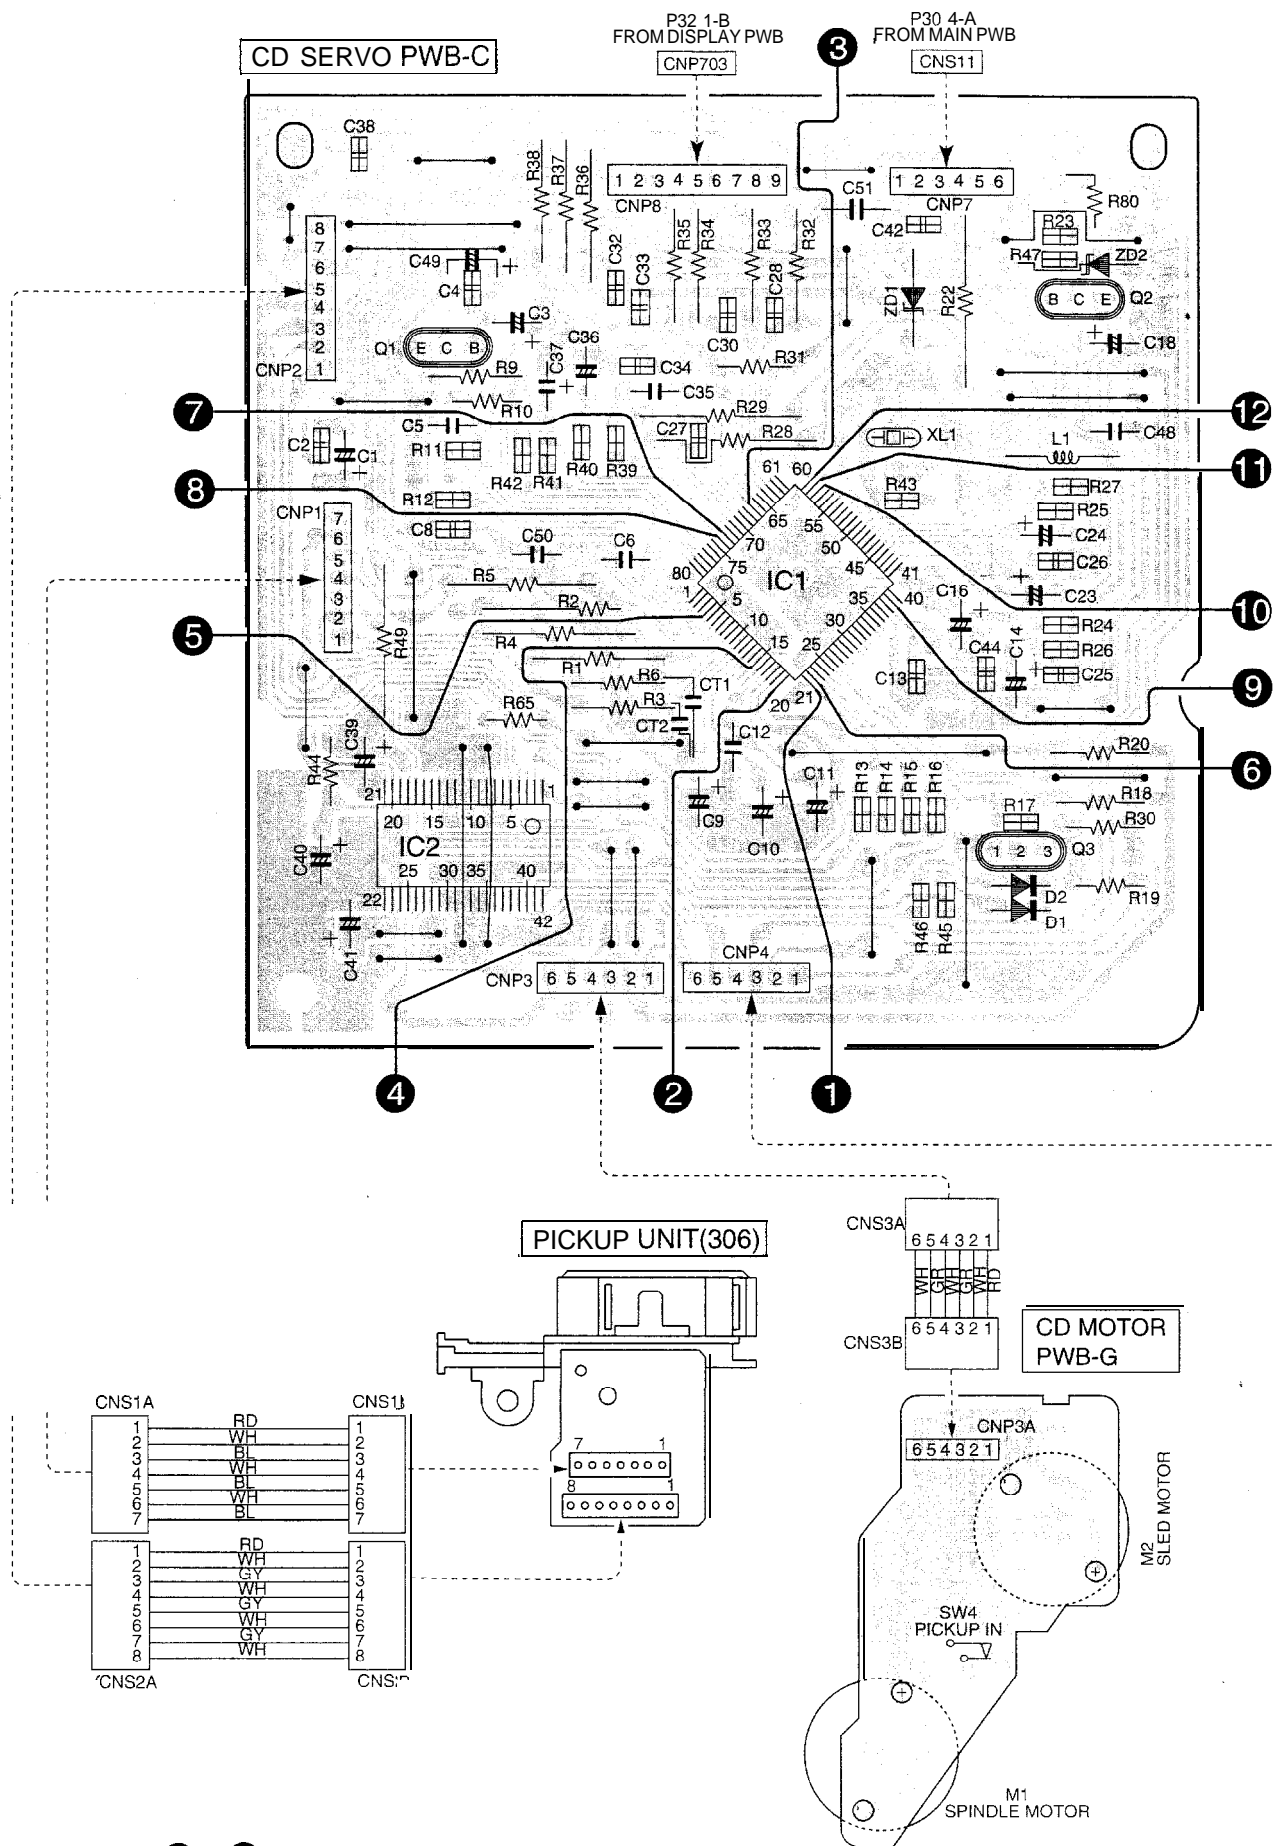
WIRING SIDE OF P.W.BOARD (8/9)
